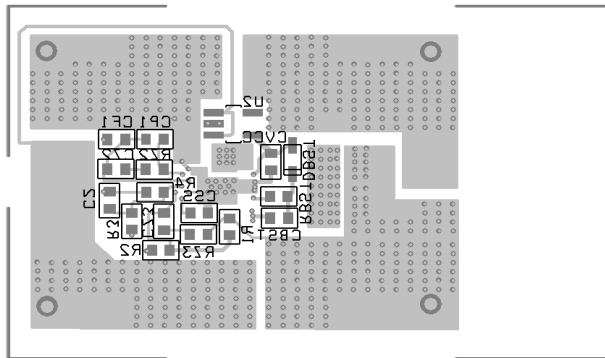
SP7651EB PC Layout Bottom Side & Component Placement
